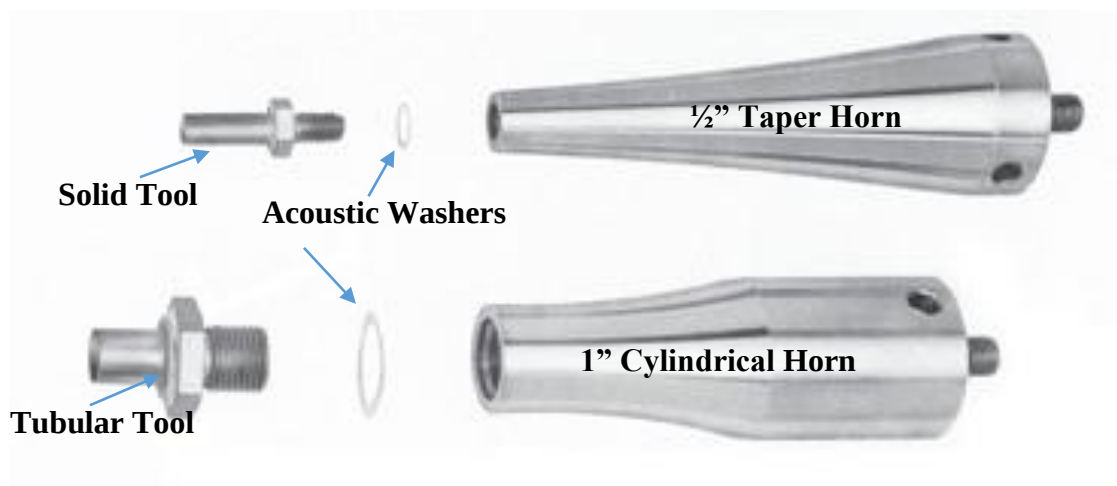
Amplifying tool holders, and mechanically attached tools for USM [40]
